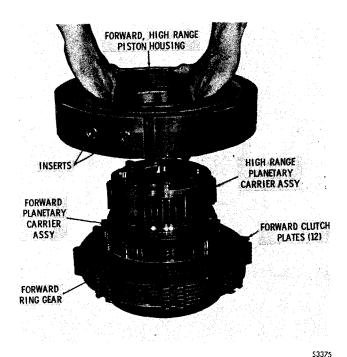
Removing forward-and-highrange clutch piston housing (pistons in place)
